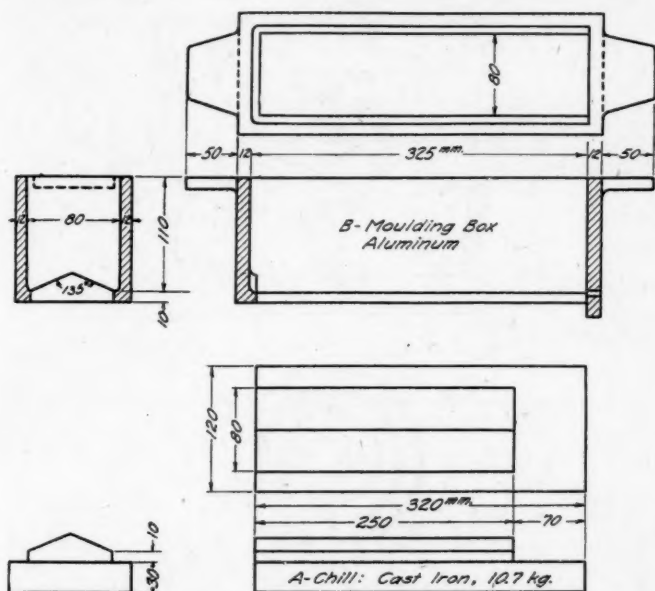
EQUIPMENT FOR MOLDING HARDENING TEST PIECES
